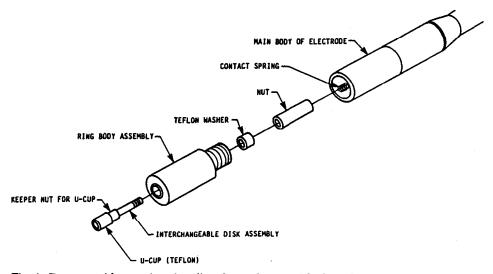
Demountable rotating ring disc electrode assembly from Pine Instrument Co.
